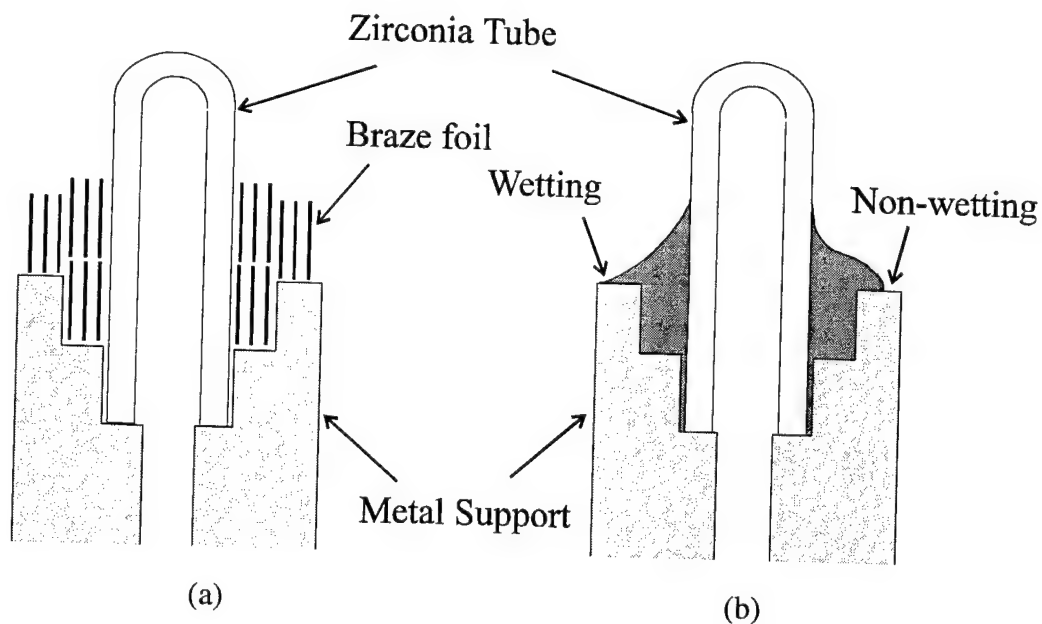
Schematic of the braze assembly before (a) and after (b) the brazing operation. The braze alloy was placed in the form of three rolls of three windings each; the two inner rolls were used to correct for possible leak paths at the overlap region of each roll, the third roll to consolidate the inner rolls. Schematic (b) shows the nature of the wetting profile for wetting and non-wetting conditions.
